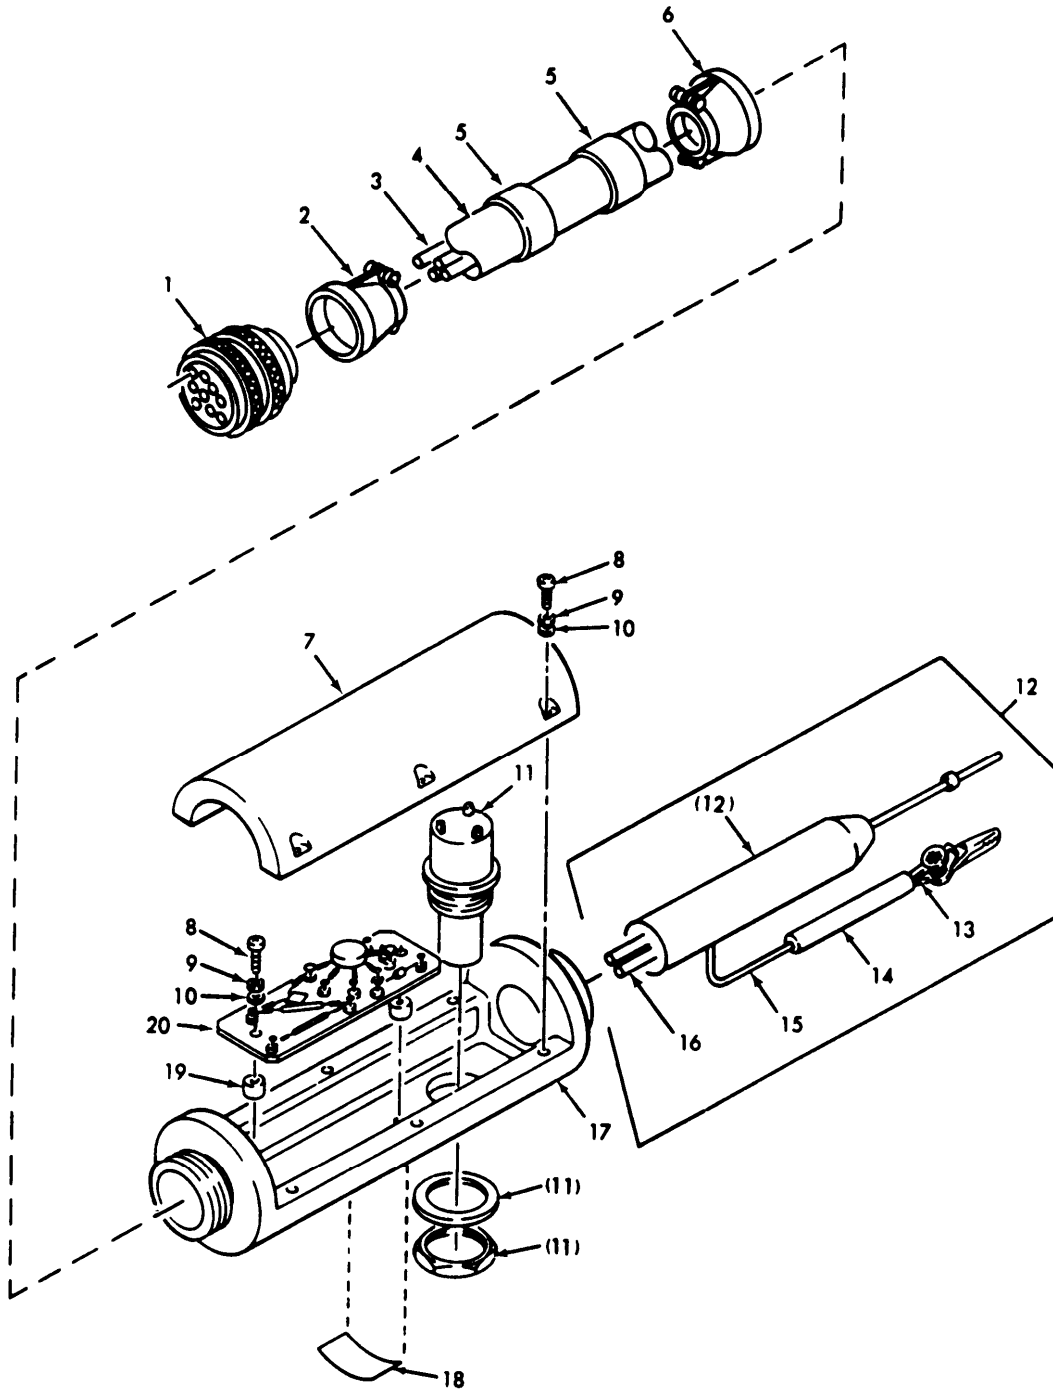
CABLE ASSEMBLY W12 COMPONENT (ASSY P/N 12303447),
